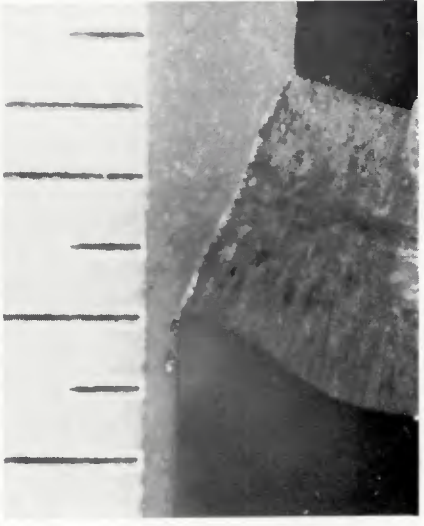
Weld UG 14(100)-10, large ID on top, 2G position, zero root opening, 1.59 mm (1/16 in.) mismatch. 1 mm scale (reduced 41% on reproduction)
